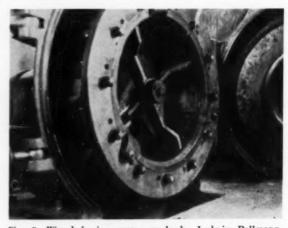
Wood-shaving cutter made by Ludwig Pallmann. This machine was developed to reduce short blocks trimmed off board ends that could heretofore only be reduced in a hog and hammermill. The blocks are dropped into a hopper from where they go to the center of the machine, and are thrown outward by four rotating arms, and through centrifugal force are pressed against knives as they are pushed around by the arms. The resultant fibers or shavings are cut at various angles relative to the wood grain. Power: 48 kw for the cross arms; 24 kw for the bowl.
